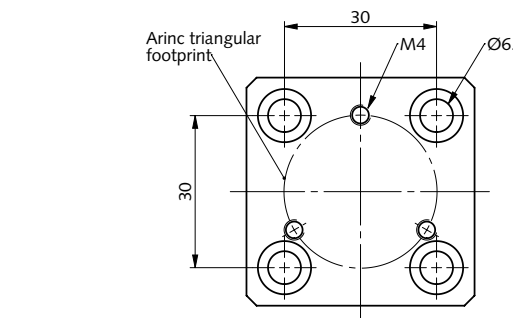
Mounting adapter to 30x30 mm hole pattern with adaption to ARINC triangular footprint
